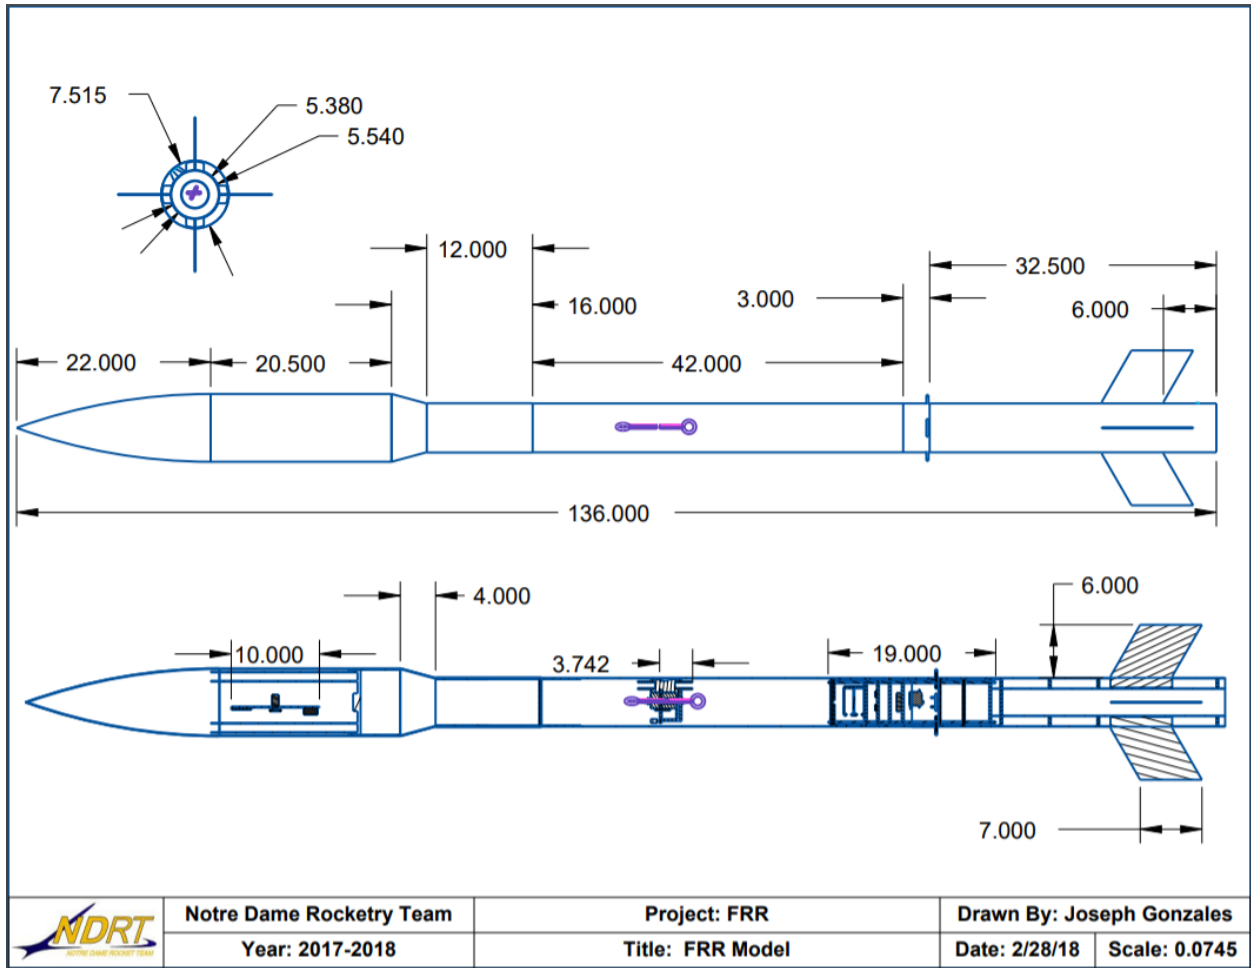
Dimensioned drawing of the overall Launch Vehicle. Units in inches.
